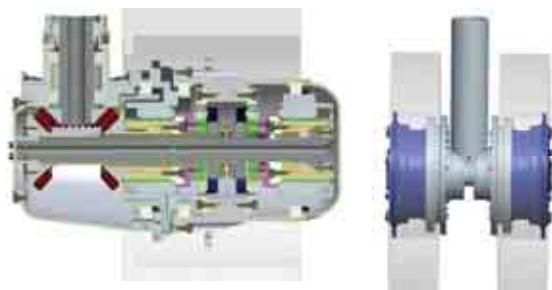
Two bevel gear actuator concepts: off-set (left) and centred (right, twin-wheel concept) driving axis
